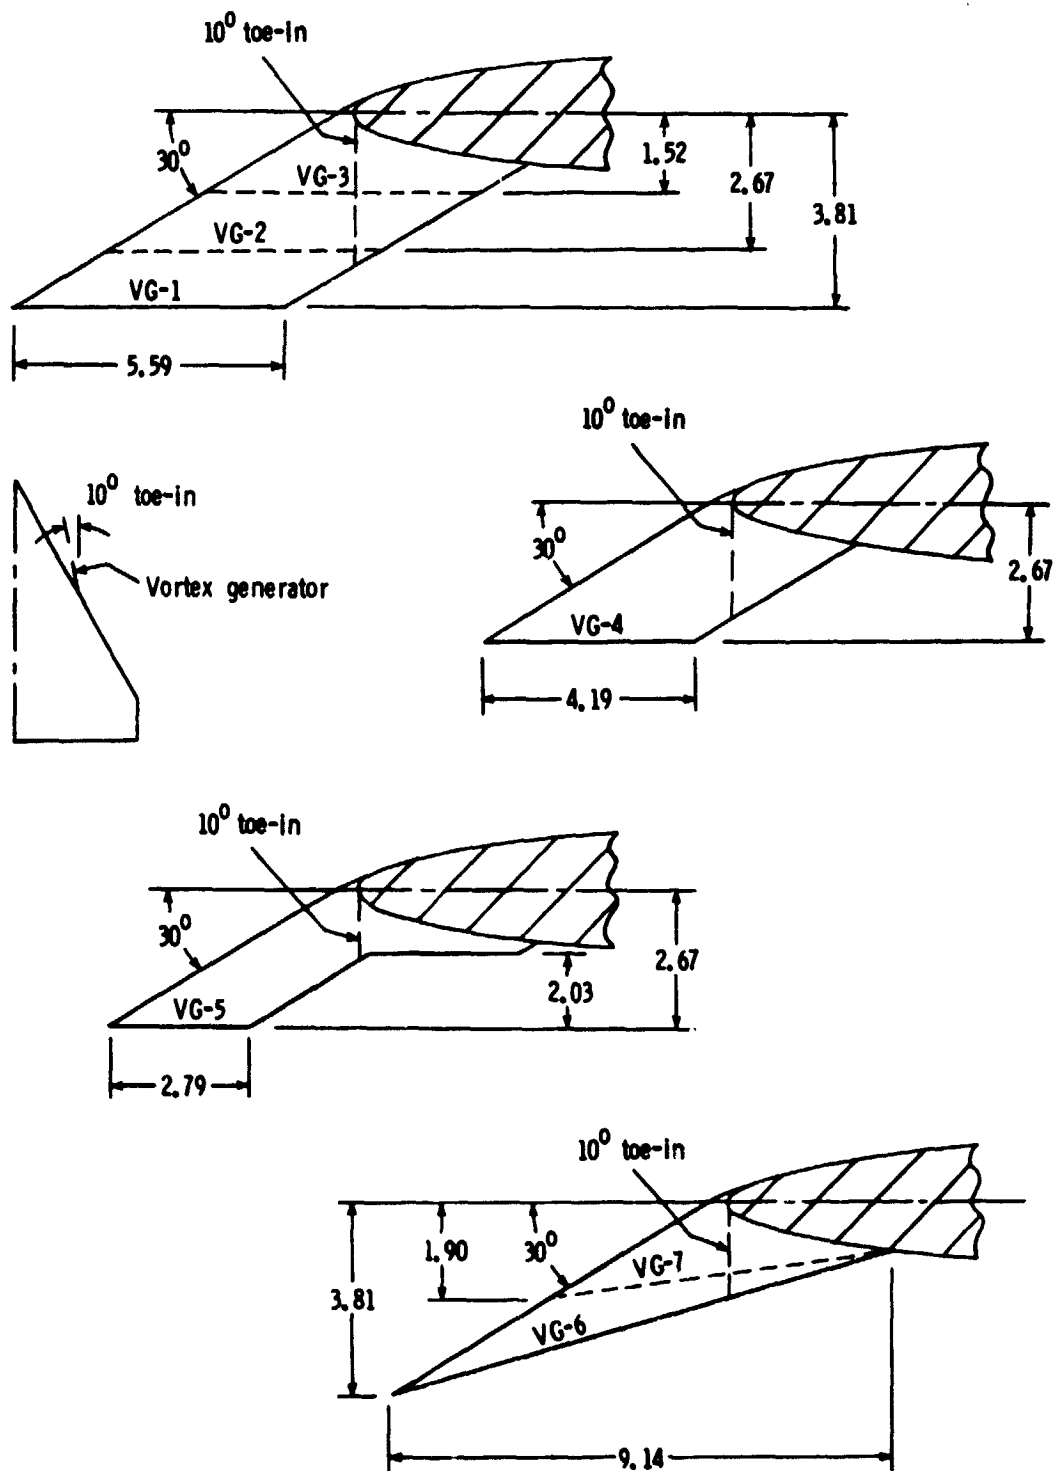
Drawing of pylon-type vortex generators tested. Dimensions in centimeters.
